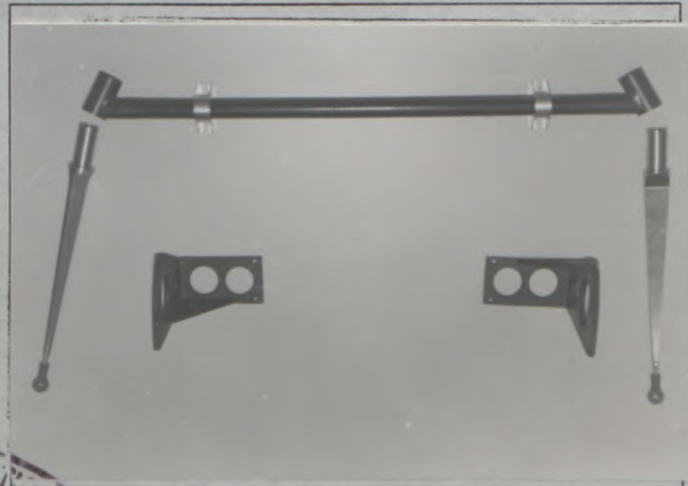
FRONT ADJUSTABLE STABILIZER ASSEMBLY
